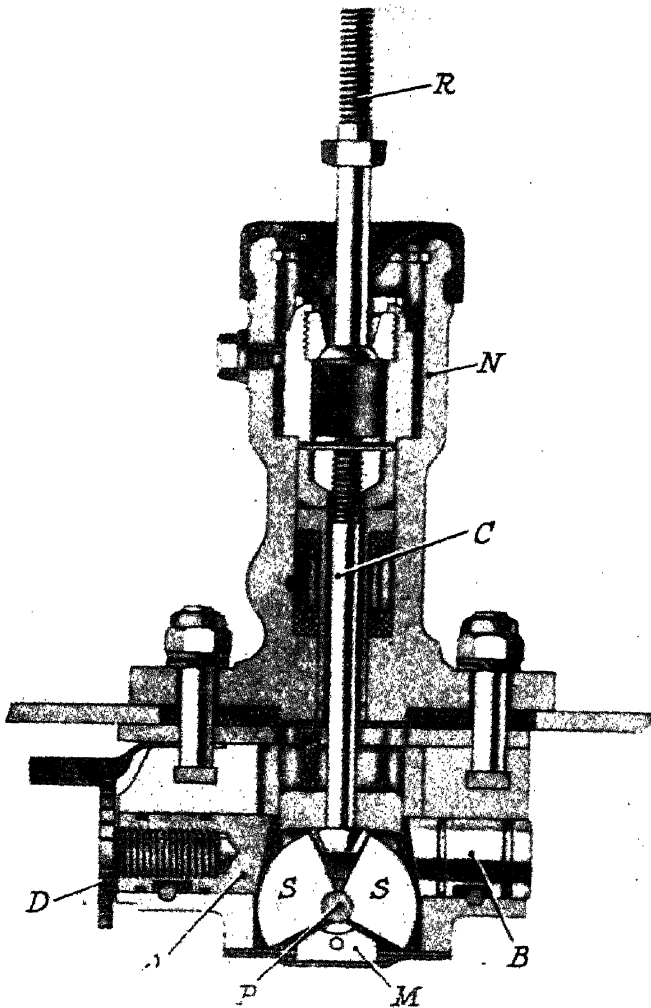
Lockheed External Cylinder Hydraulic Brake Unit.
